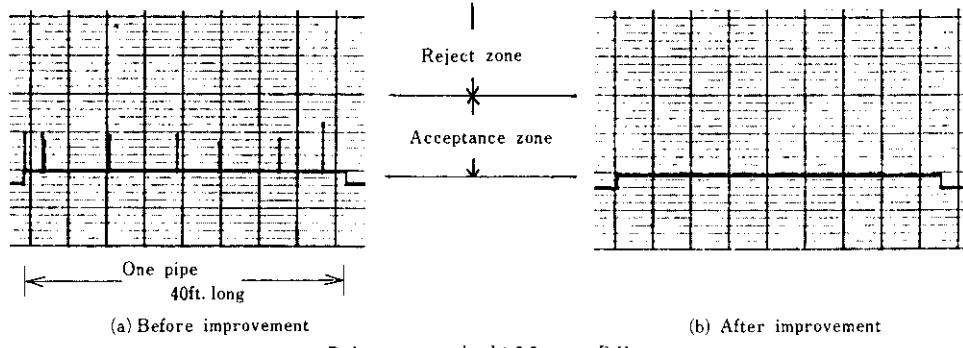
Examples of ultra sonic test recording chart for the welded seam
